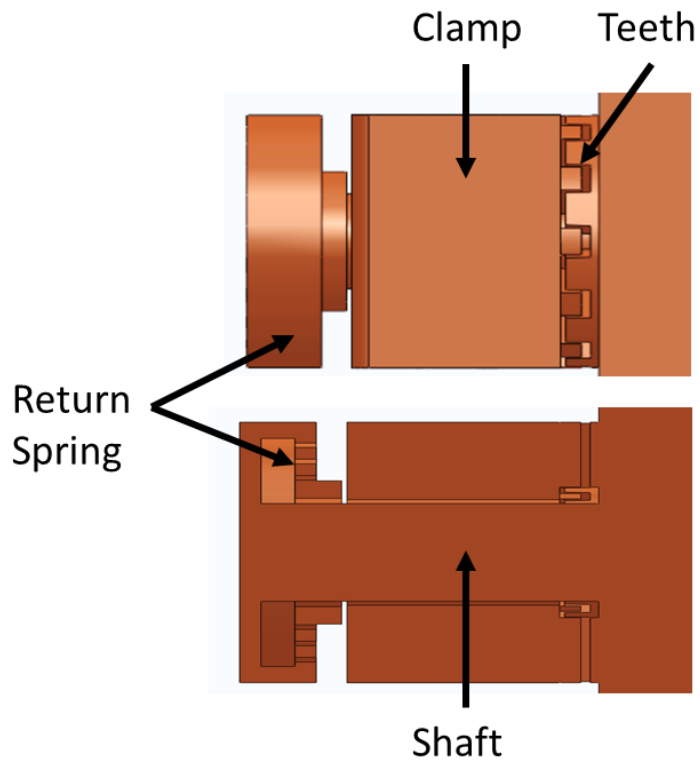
Detail view of the clamp rotation mechanism (top), and cross-sectional view (bottom).
